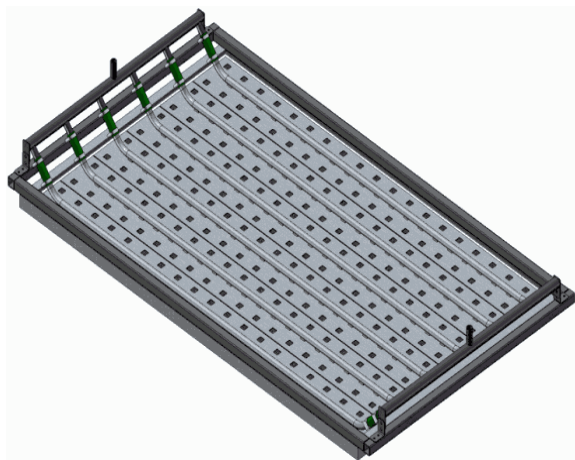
General view of HSGM module, equipped with a cooling system on the back side
